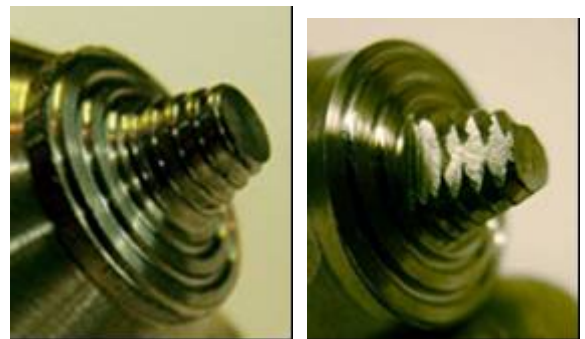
Two tool designs that will be investigated in this project include the stepped spiral tool (on the left) and the three flat tool (on the right). (Pictures are for illustration only; actual designs will vary.)
